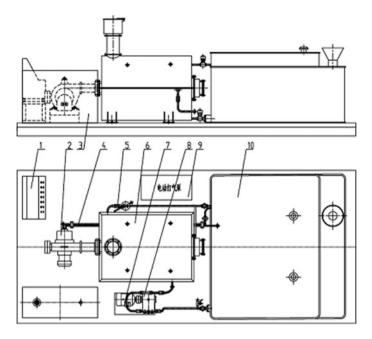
Sketch of skid-mounted structure. (1, Control Cabinet 2, Burner 3, Generator 4, Diesel Pipeline 5, Boiler Exhaust Pipeline 6, Vehicle Special Boiler 7, Motor Drive 8, Ceramic Piston Pump 9, Electric Air Pump 10, Oil and Water Cabinet)
